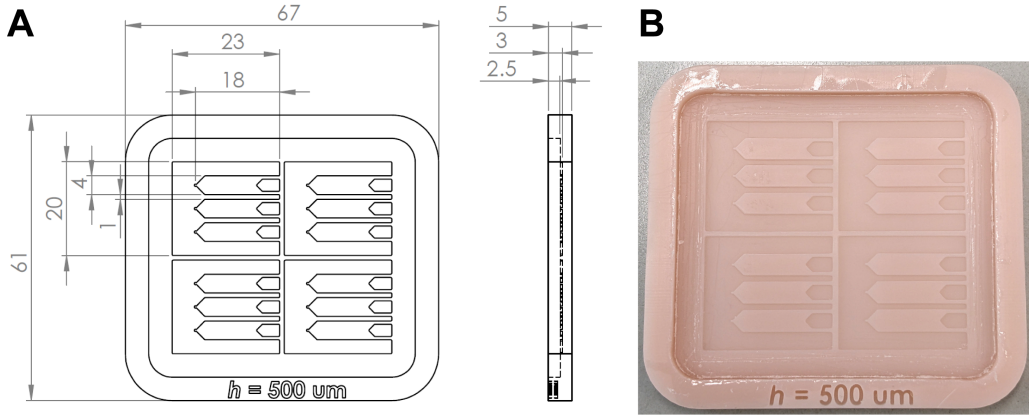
3D-printed mold for the upper layer with three separate gas channels. (A) Dimensions of the designed mold in mm. (B) Image of the printed mold.
